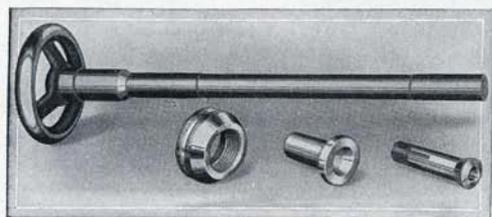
Hand Wheel Draw-in Collet Chuck Attachment with one Round Split Collet.
